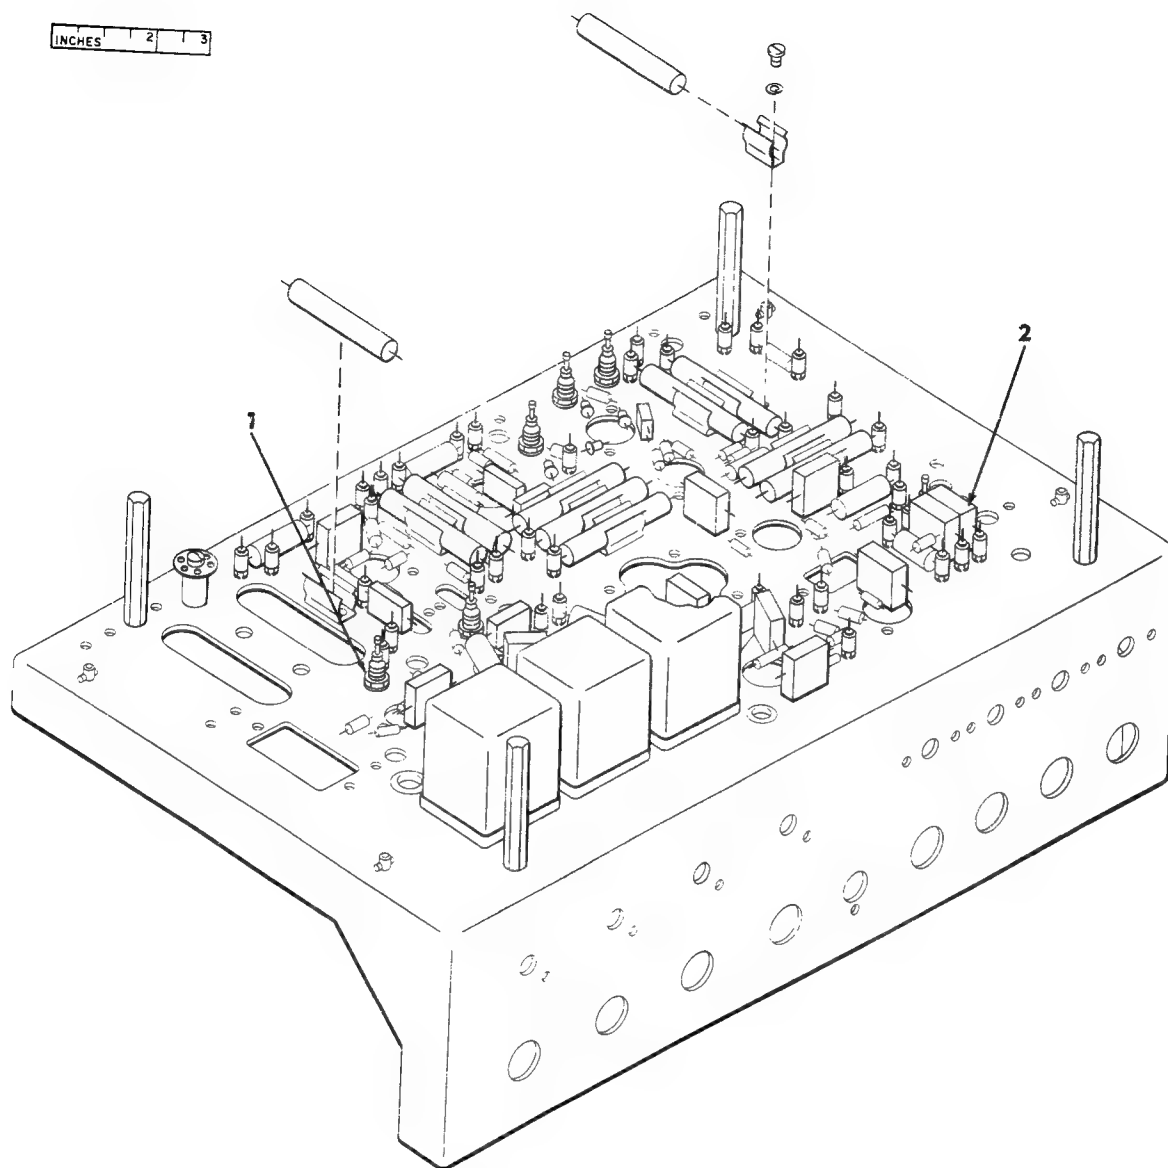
Synchronizer, electrical (9136696)—partial exploded view
